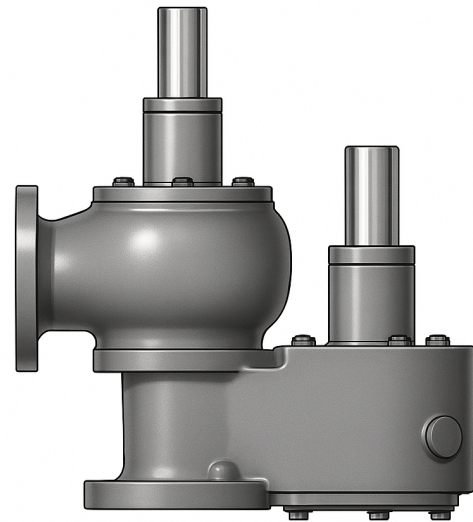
Type 4040HC Pressure and Vacuum Relief Valve
